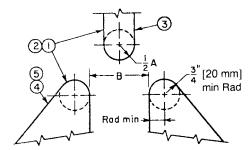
Alternative Roller-Equipped Guided-Bend Test Jig
